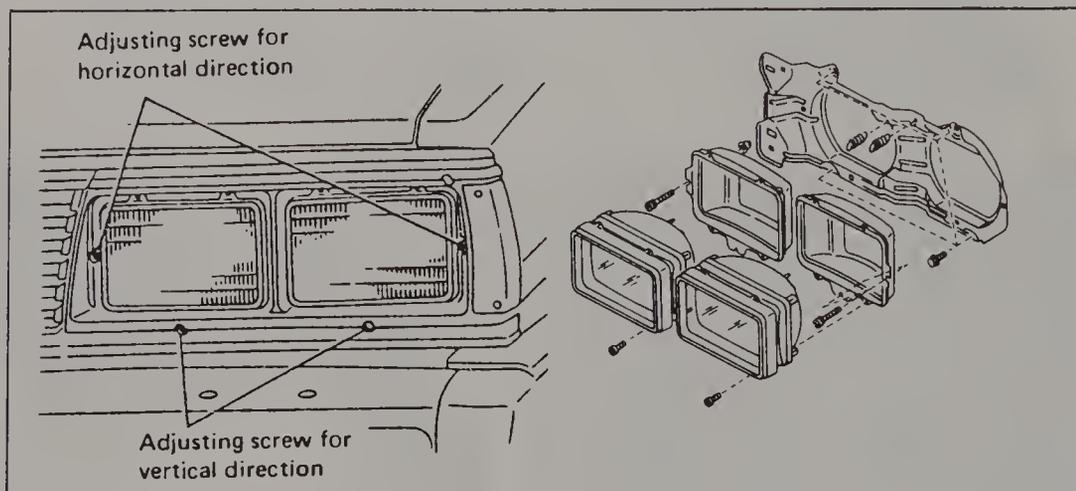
Dual headlight components – exploded view (Sec 10)
